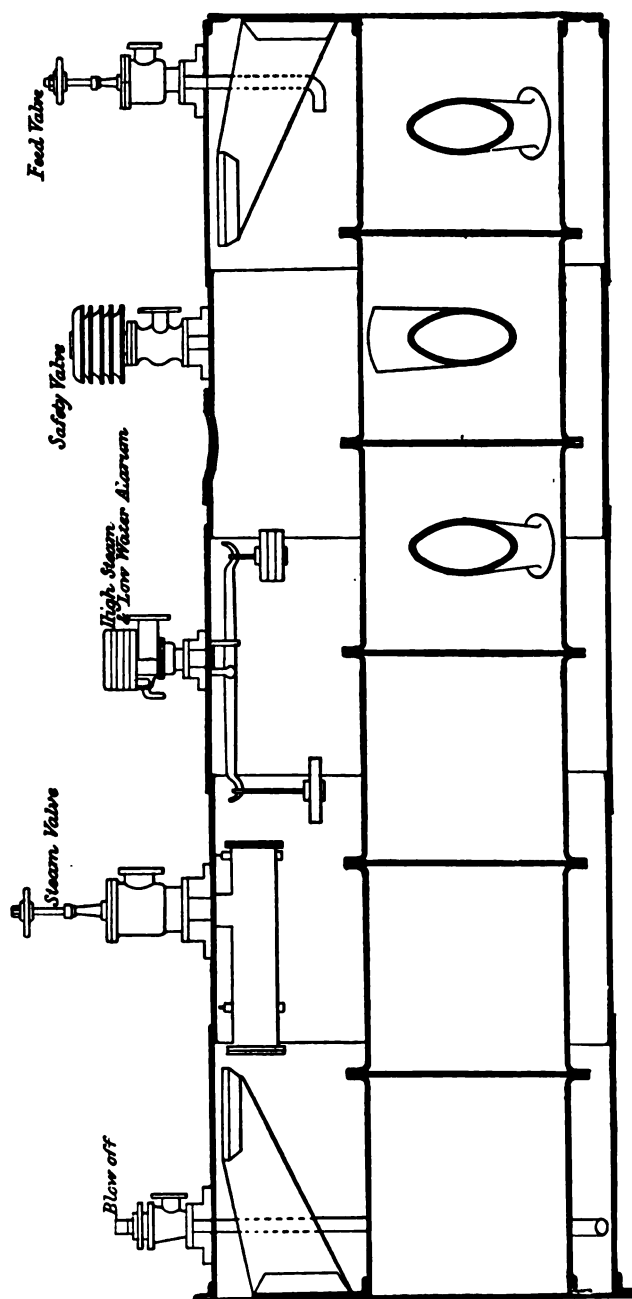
Cornish Steam Boiler: Penman & Co. Longitudinal Section. Scale 1/32d.
